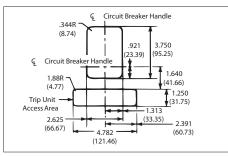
Circuit Breaker Escutcheon Dimensions for 3-Pole Circuit Breakers.
